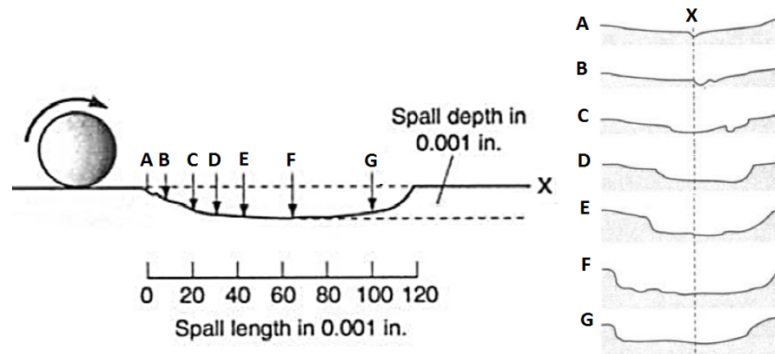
Typical of spalling damage during rolling contact fatigue in rolling element bearings [40].
